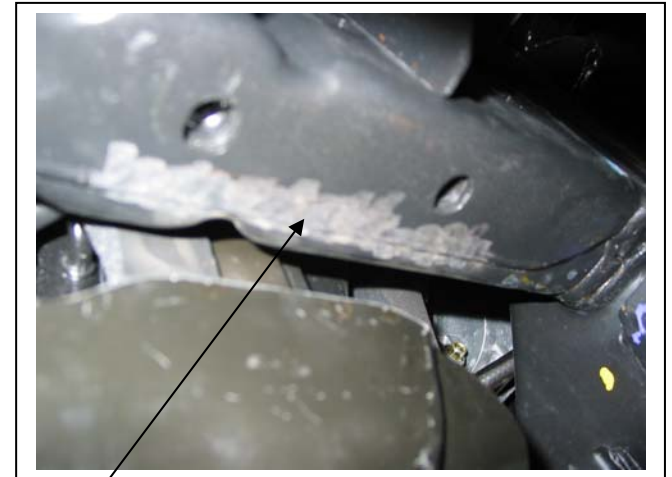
Use a sharp knife to cut front of bumper along crease line.
